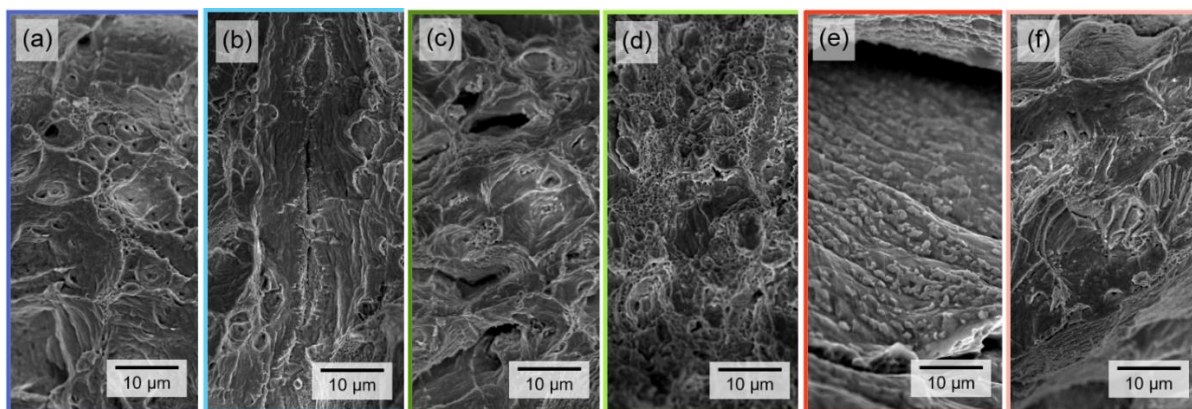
SEM images of the fracture areas marked in Figure 3; (a), (b) weld A-1; (c), (d) weld C-1 and (e), (f) weld E-1
